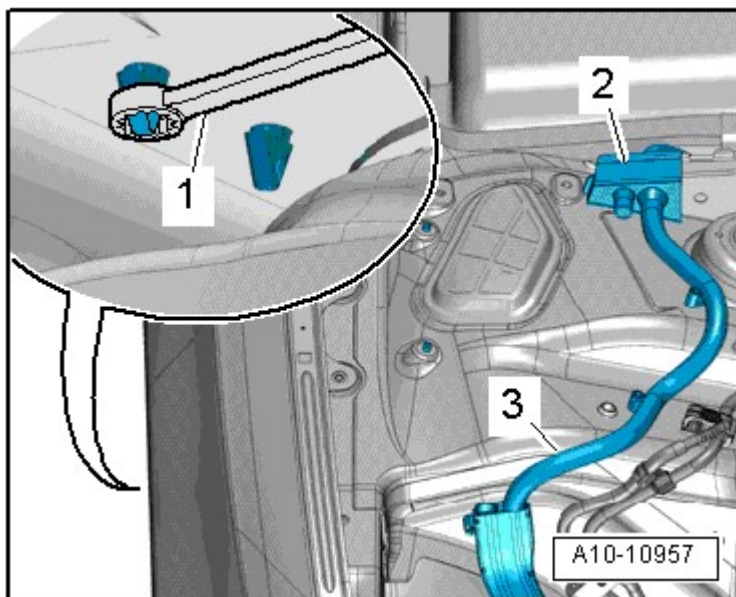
Releasing Retainers From Wheel Housing Side Using A 5.5 Mm Open End Wrench
